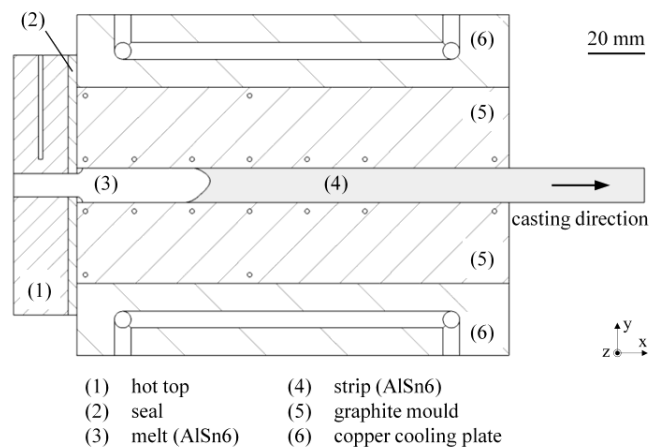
Schematic of the casting mould to produce a single layer AlSn6 strip
